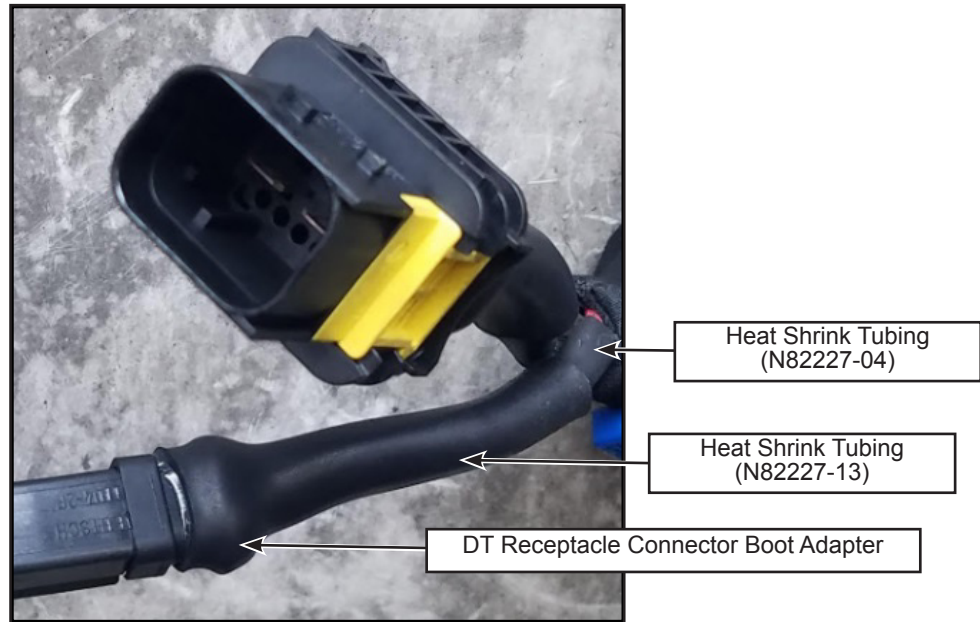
Heat Shrink Tubing Installation on DT Receptacle Connector Wiring at Harness Side
